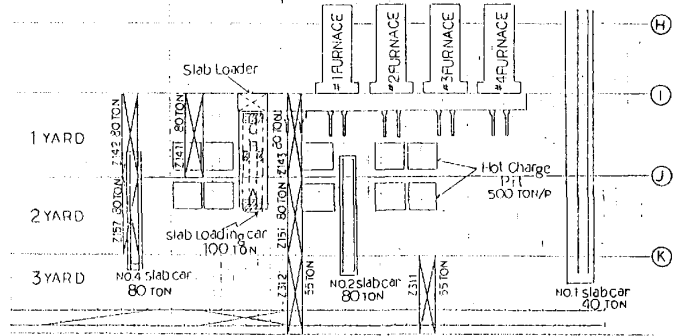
SLAB YARD LAYOUT OF #2 HOT STRIP MILL
